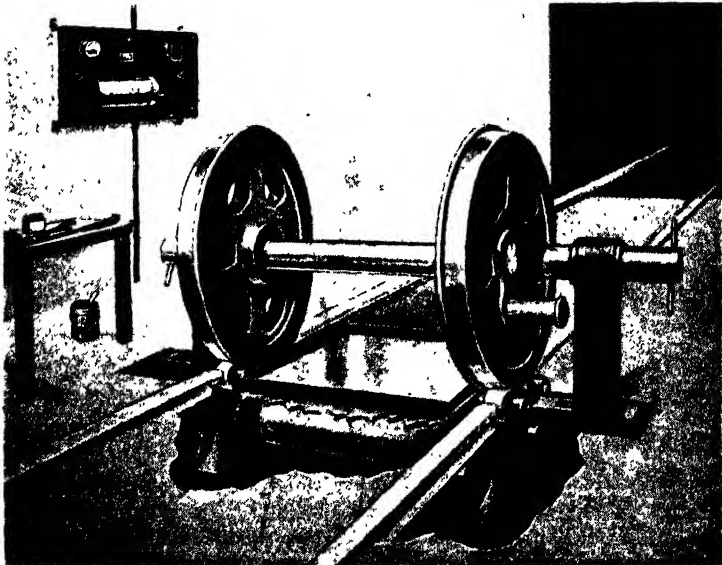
CRACK DETECTOR FOR LOCOMOTIVE AXLES AND CRANKSHAFTS
